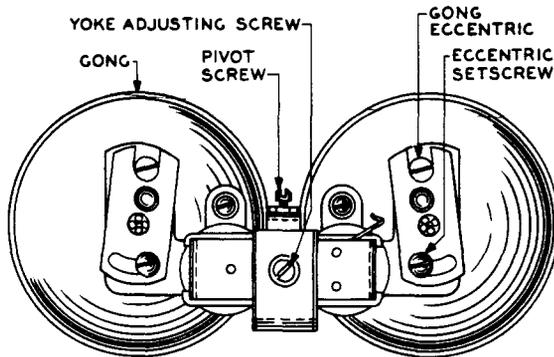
Adjusting Screws for Eccentric-type Gong Mountings
